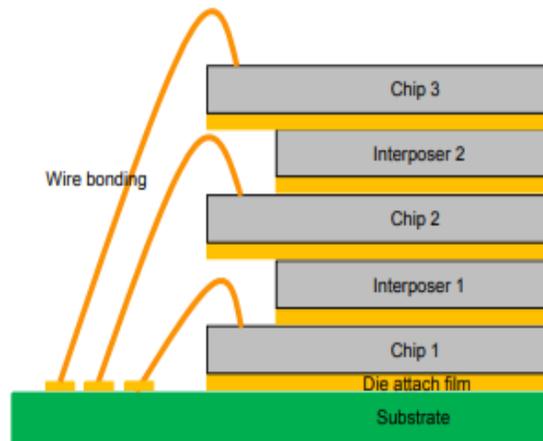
3 DIE STACKED 3D WIRE BONDED PACKAGE
